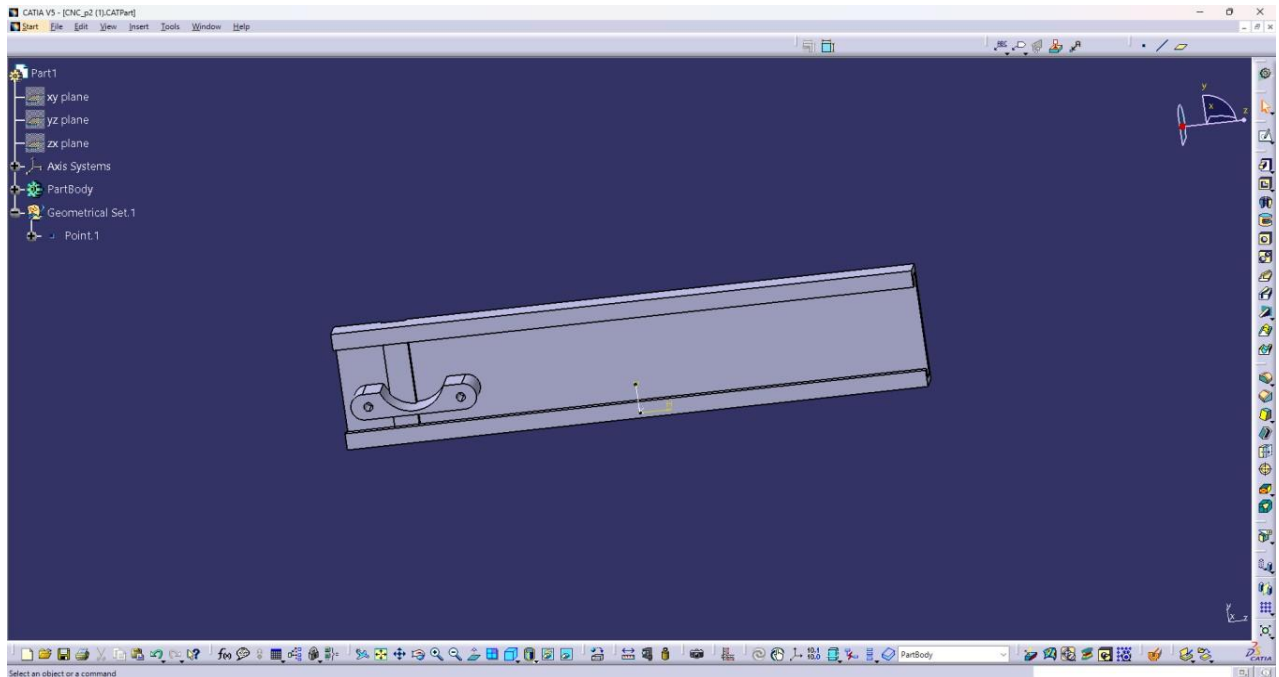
3D Printed CNC Plotting Machine- Parts
